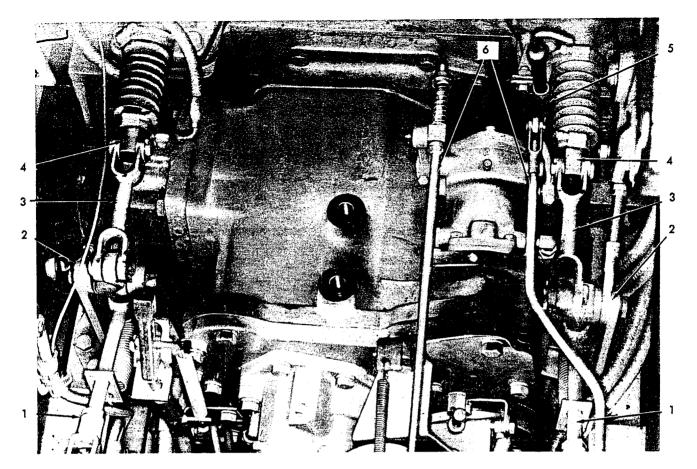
Transmission Installed After Removal of Steering Lever Bracket (Early HD6EP Shown - HD7G Similar) (T-35010)
